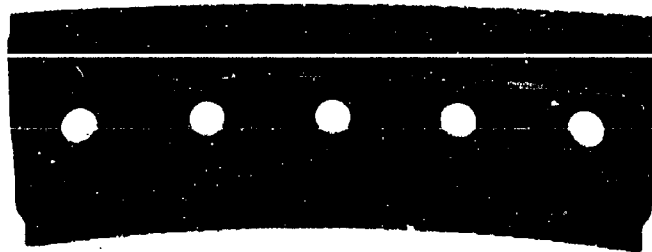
J93 COMPRESSOR SHROUD WITH HONEYCOMB FORWARD AND AFT SEALS
